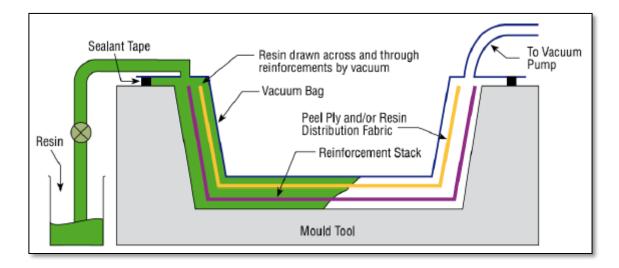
Schematic of resin transfer moulding (Guide to Composites, 2015)
